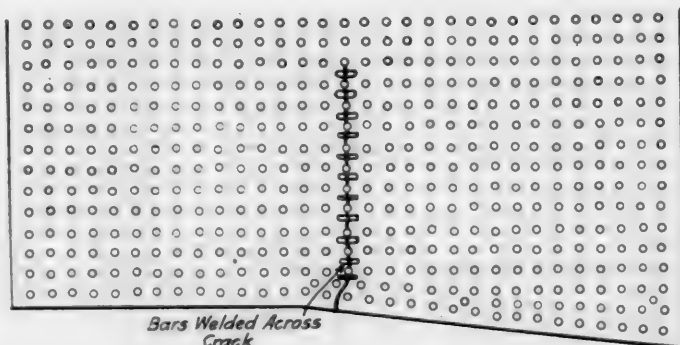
Method of Reinforcing Welded Cracks
